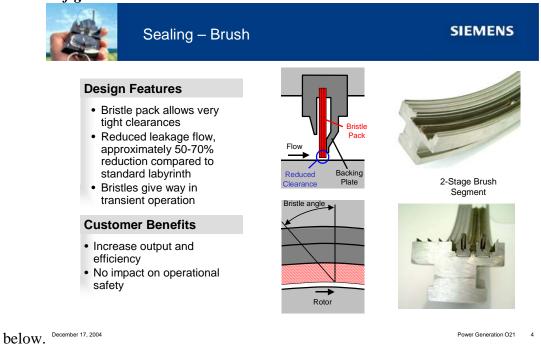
BRUSH SEAL ARRANGEMENT AND DETAIL
